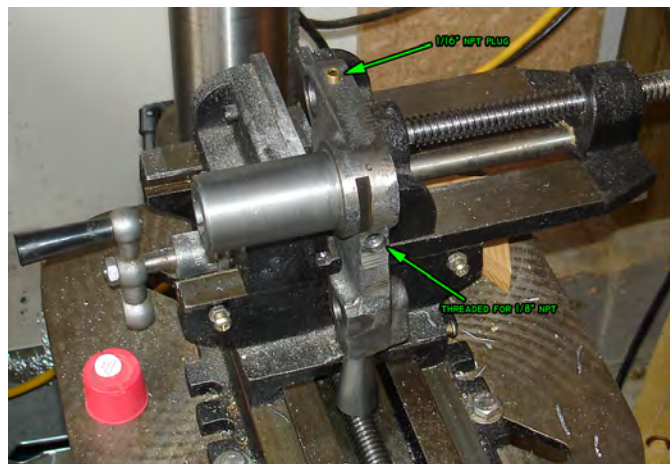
Reverse casting showing where 1/16" pipe plug has been substituted for the 3/16" plug that was previously in place.
